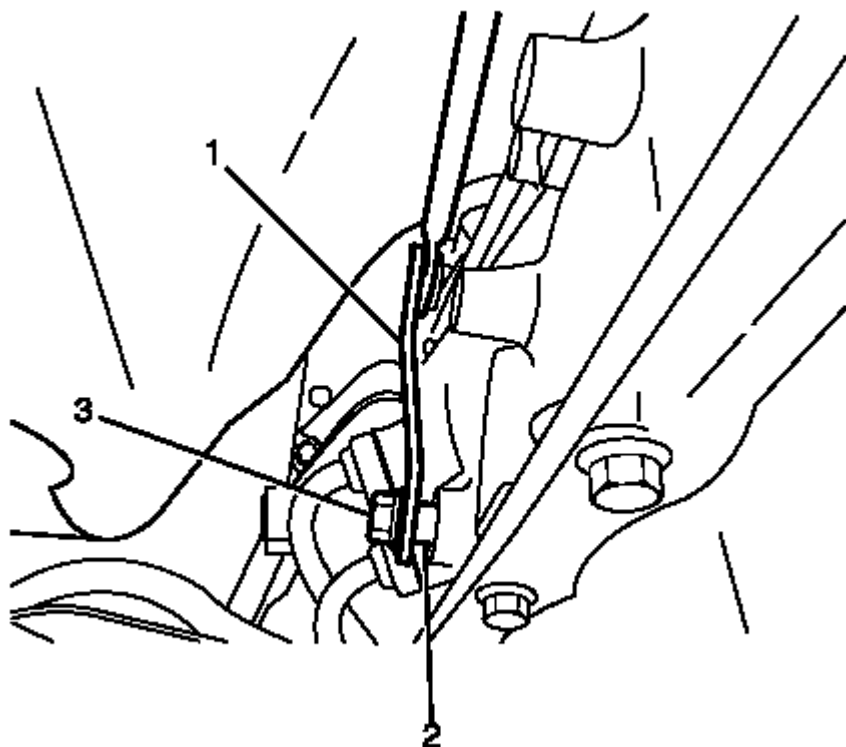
Identifying Shift Selector Linkage Rod To Shift Selector Shaft Retaining Nut
